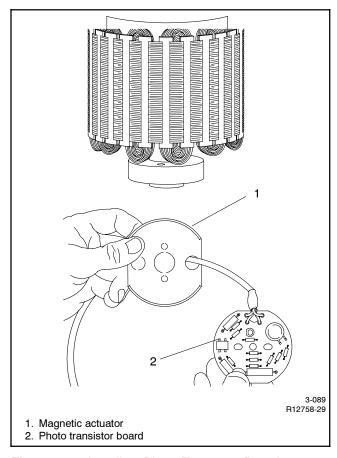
Installing Photo Transistor Board (20-300 kW models shown)
